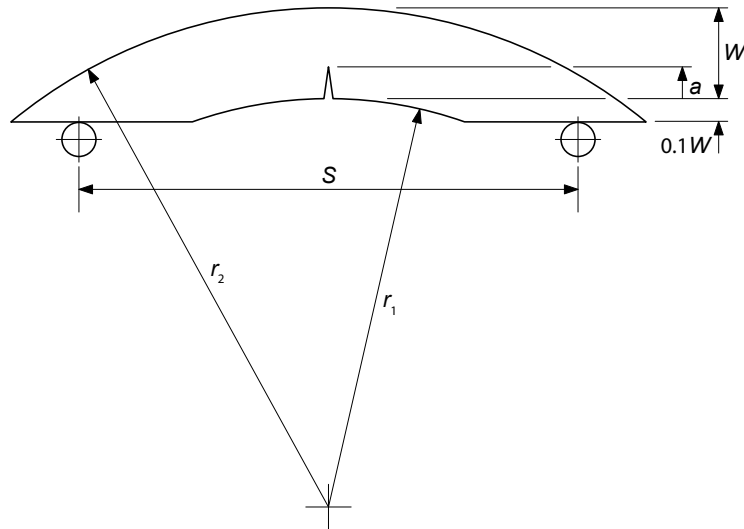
Arc shaped geometry dimensions according to ASTM E 399-90
